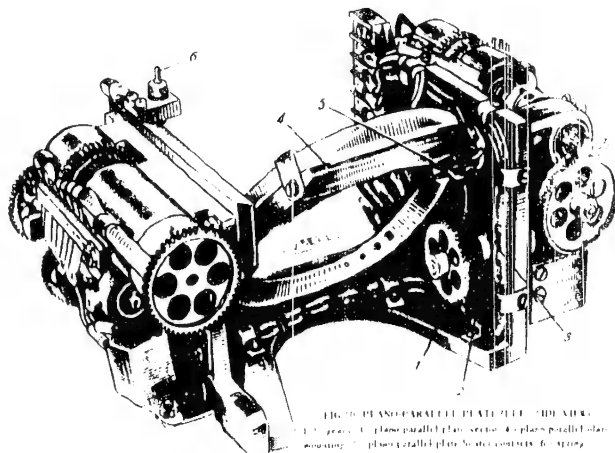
PLANO-PARALLEL PLATE UNIT (SIDE VIEW)
